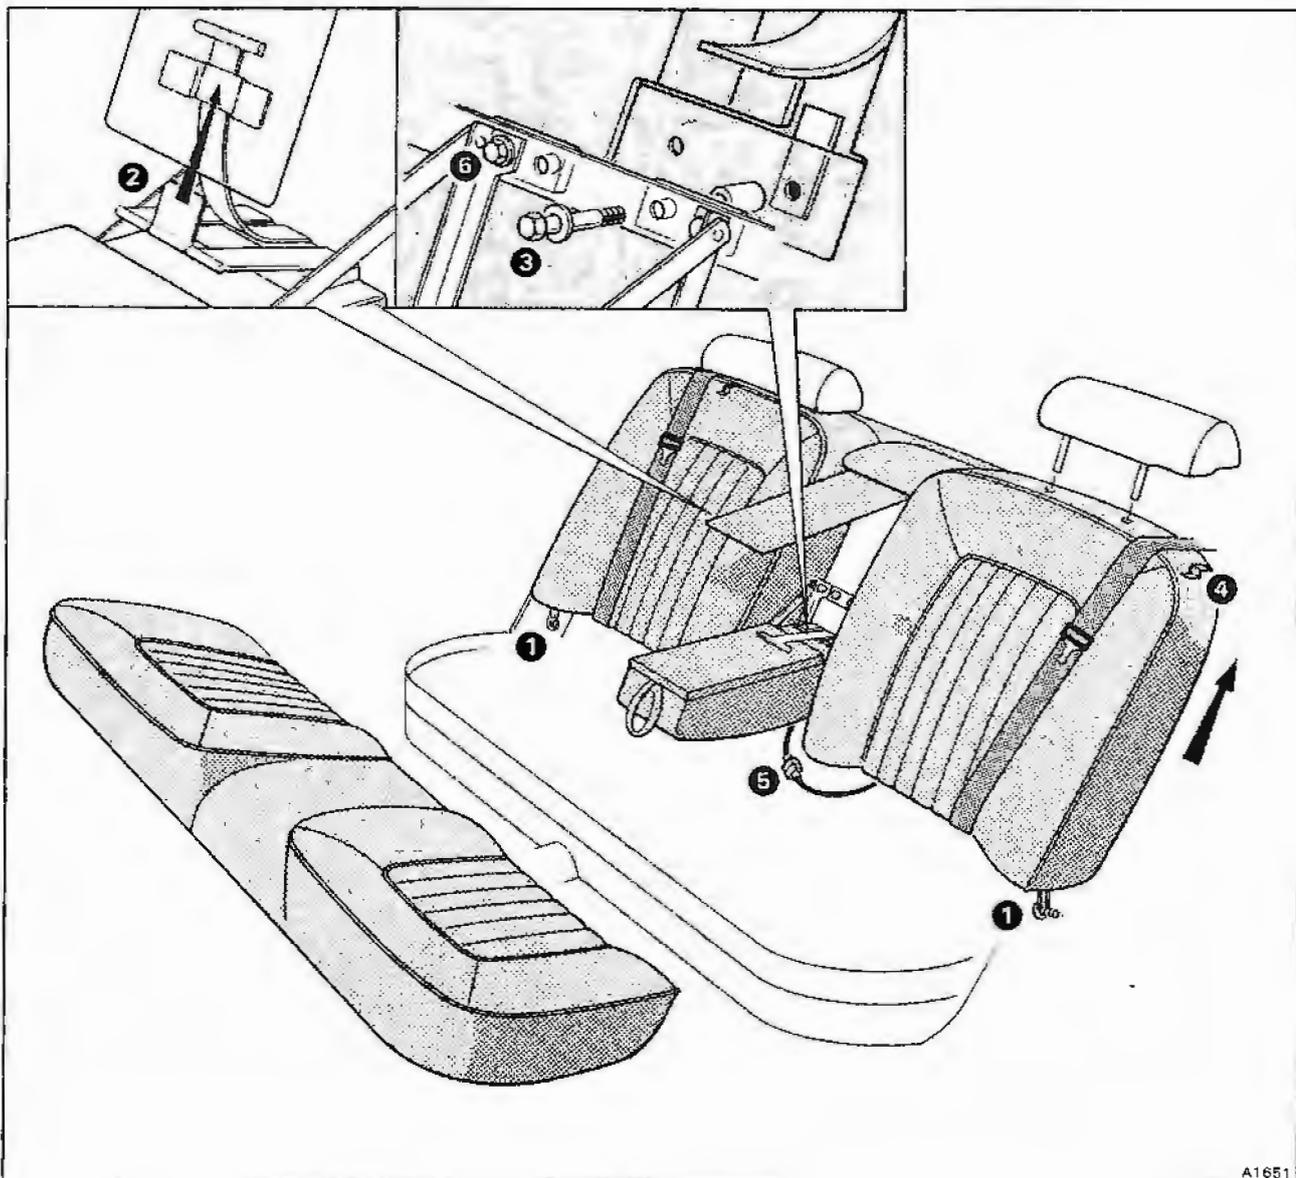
Rear seat trim – Other than Bentley Turbo R
